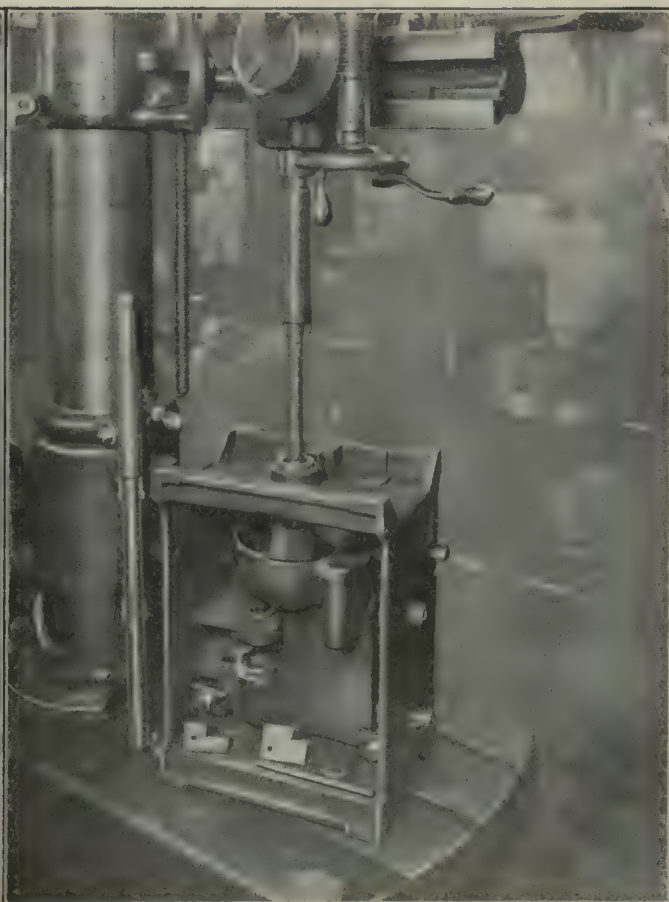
THE CAP AND BRACKET ASSEMBLED
